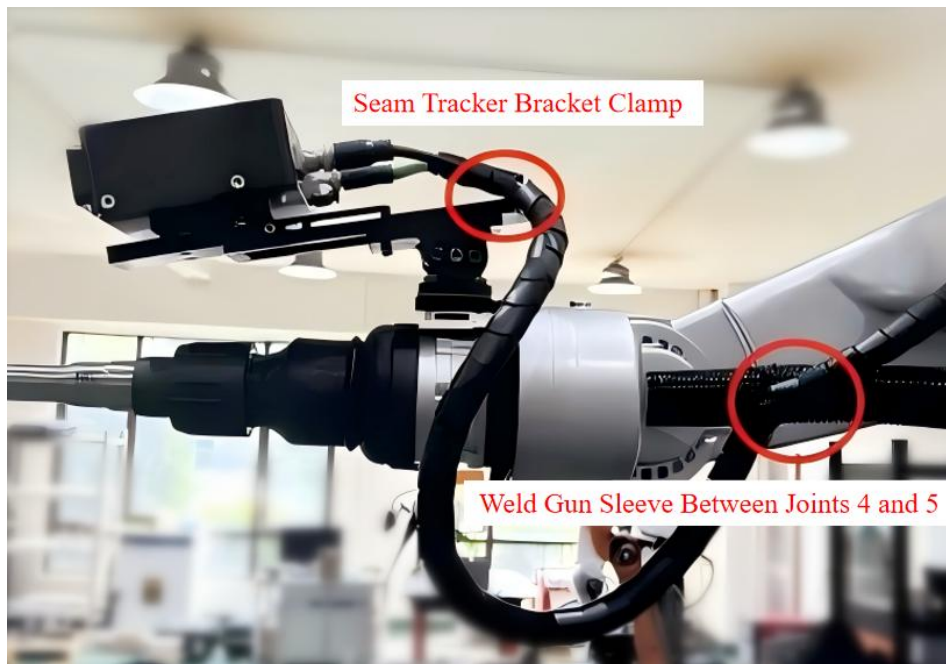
Clamp and weld sleeve anchor points
